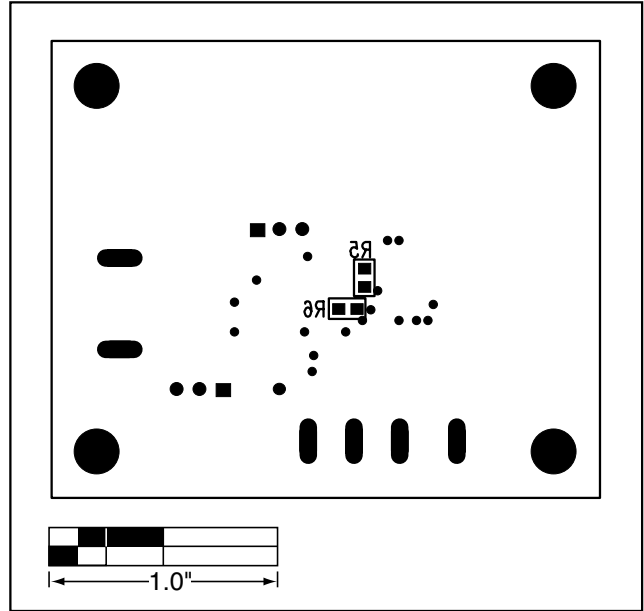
MAX1791 EV Kit Component Placement Guide—Solder Side
